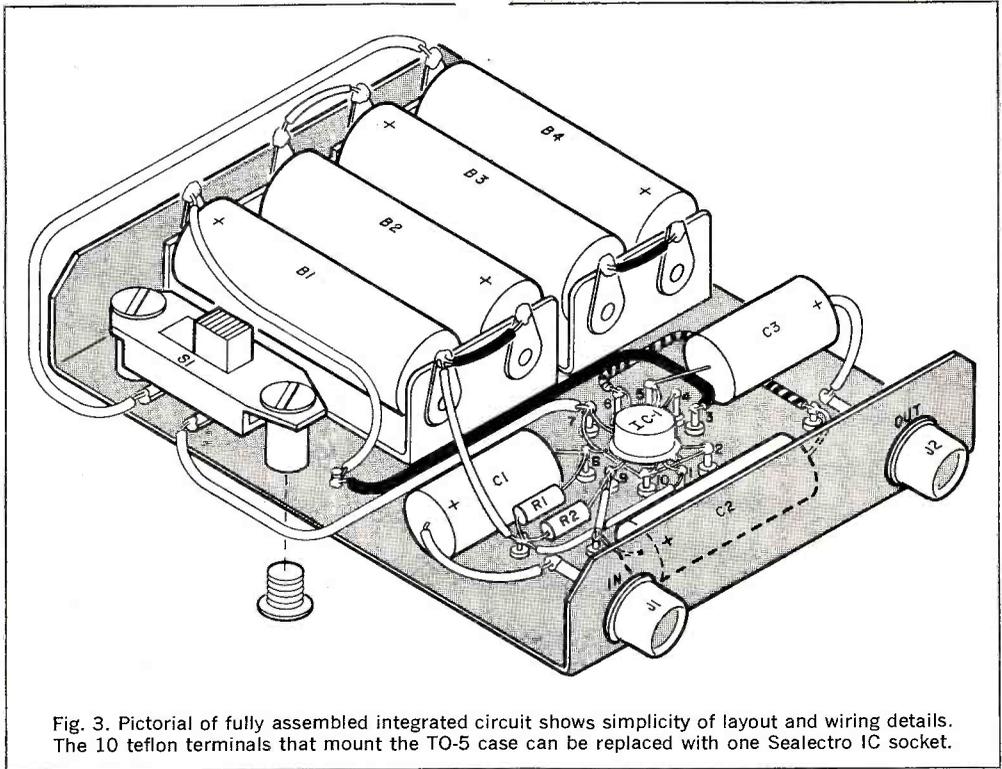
Pictorial of fully assembled integrated circuit shows simplicity of layout and wiring details. The 10 teflon terminals that mount the TO-5 case can be replaced with one Sealectro IC socket.
